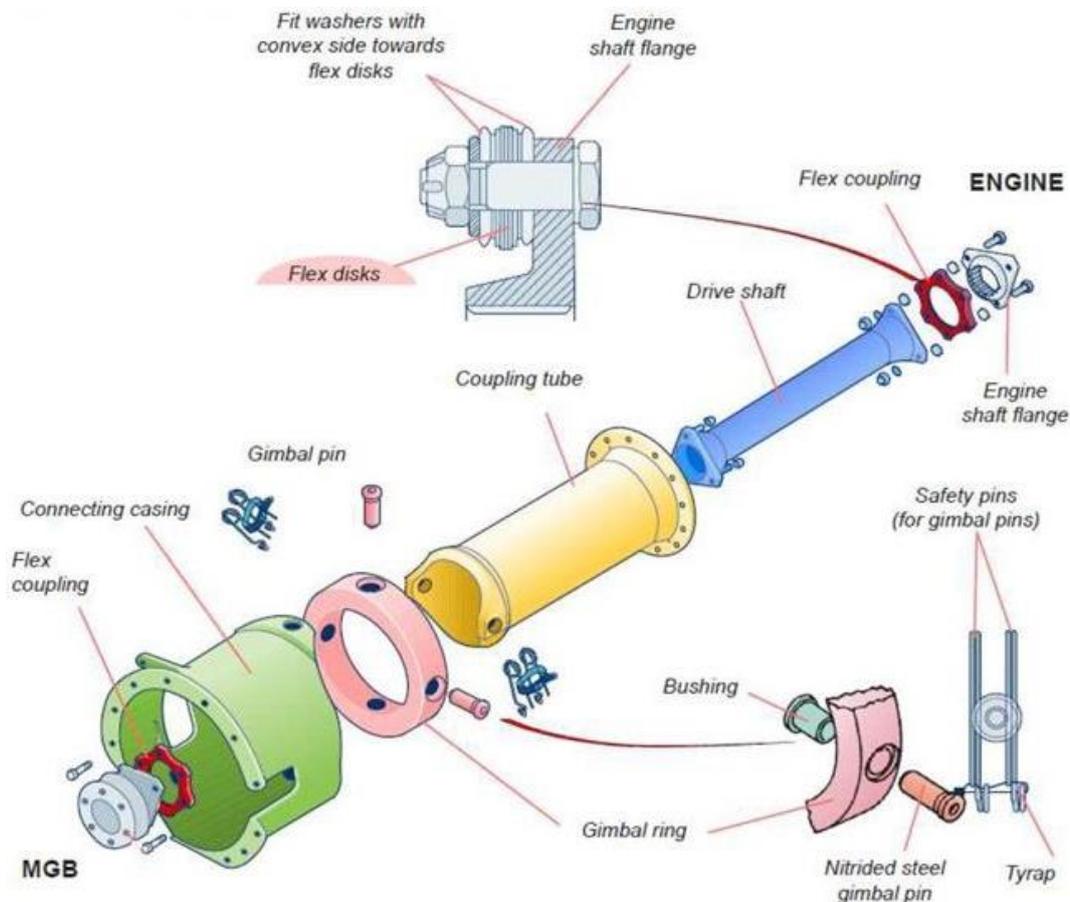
On the drawing, the drive shaft for the main gearbox is marked in blue and the flexible couplings at either end are marked in red. Illustration: Airbus Helicopters/NSIA
